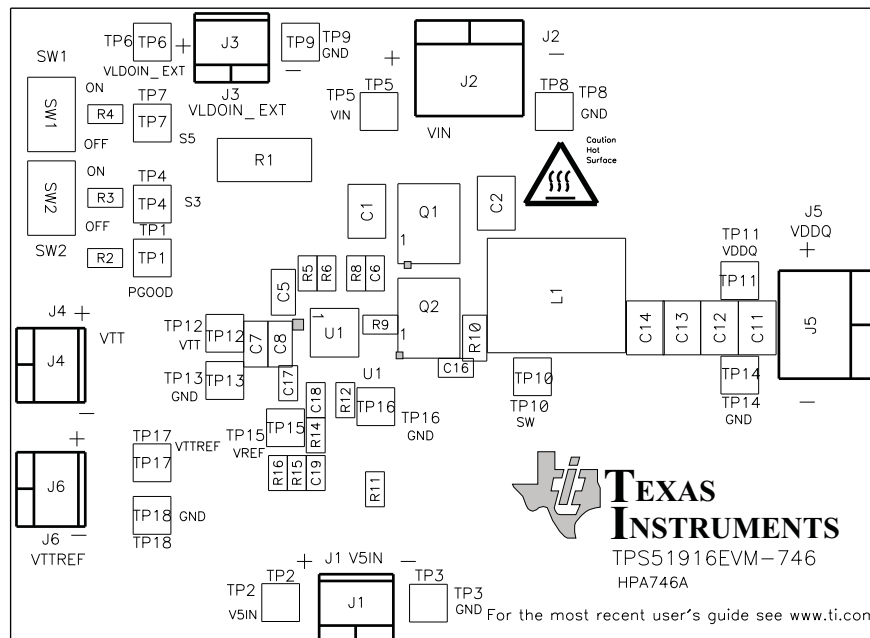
TPS51916EVM-746 Top Layer Assembly Drawing
